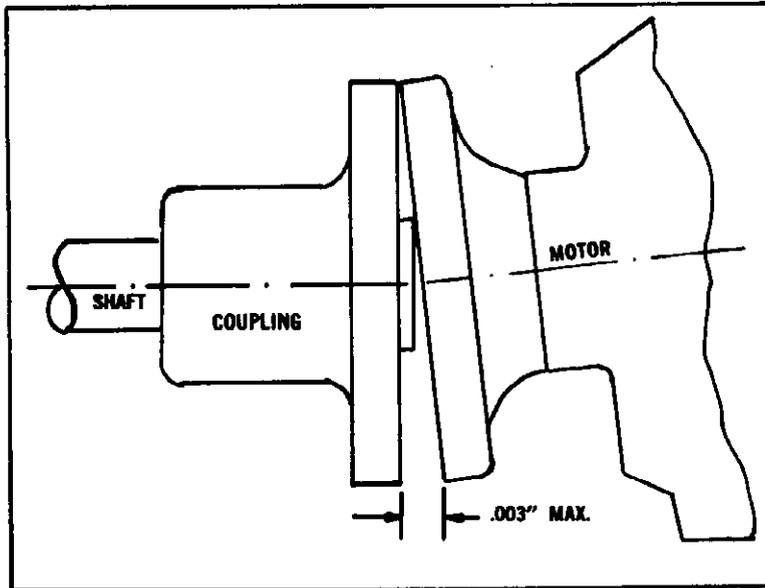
When checking engine to shaft coupling alignment, make sure the transmission coupling and shaft coupling have no more than .003" maximum clearance between them. Plastic isolator must be removed for checking alignment and reinstalled when alignment check is completed.
